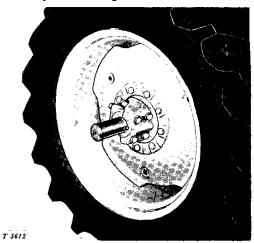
Sliding Hub Rear Wheels (R, RU, and RUS)
